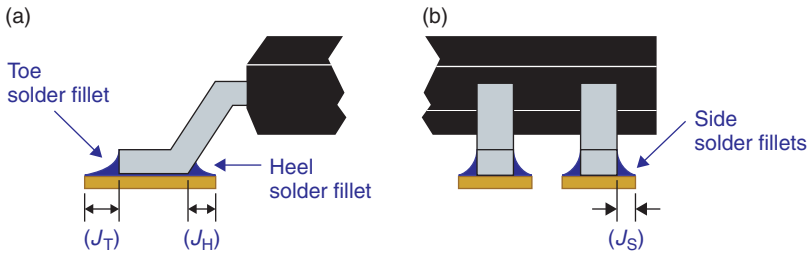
SMD padstack requirements. (a) Side view. (b) Toe view.
